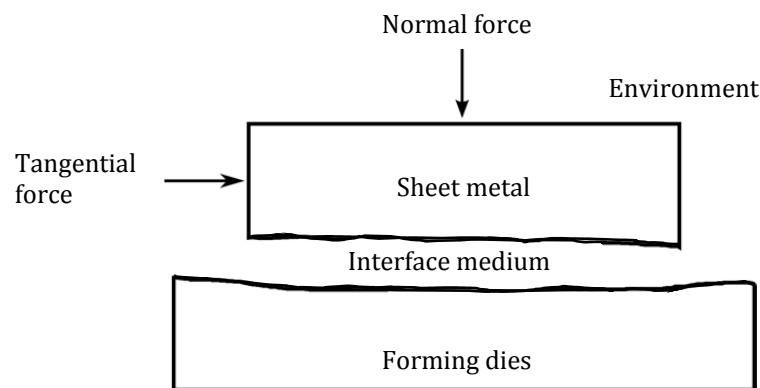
Schematic showing the unlubricated drawing and deep drawing tribological system
